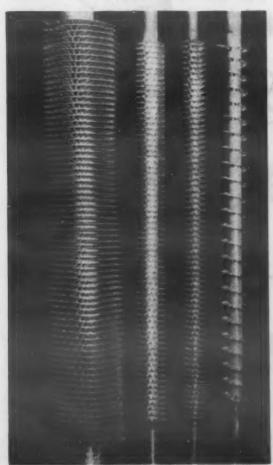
The return bends of this copper heat exchanger are attached by immersing each end of the assembly in a salt bath and silver soldering 12 joints simultaneously.
